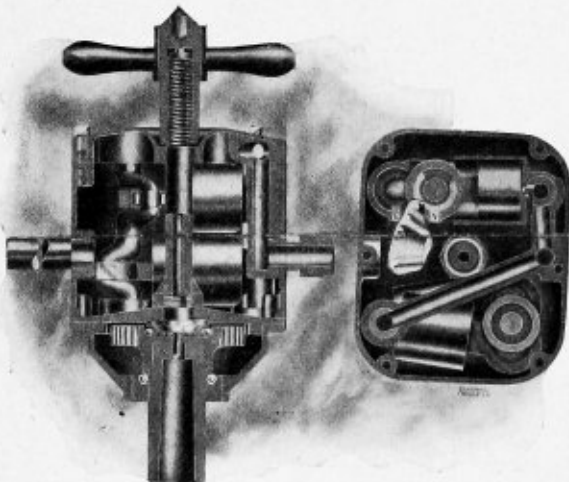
SECTIONAL VIEW OF MONARCH DRILL.
